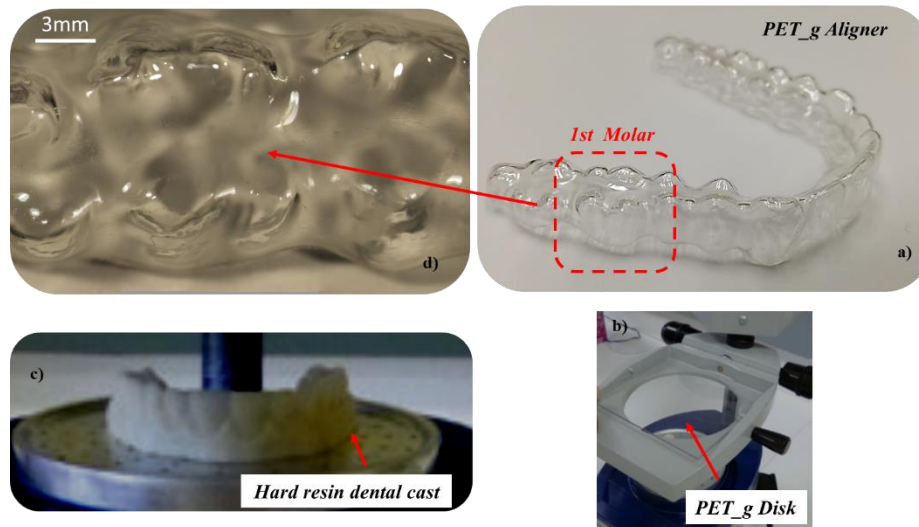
a) PET-g aligner sample after thermoforming, b) PET-g disc of 0,88 mm thick inserted in the support plate of the Erkodent® 3D vacuum machine used for termoformed the clear aligners
